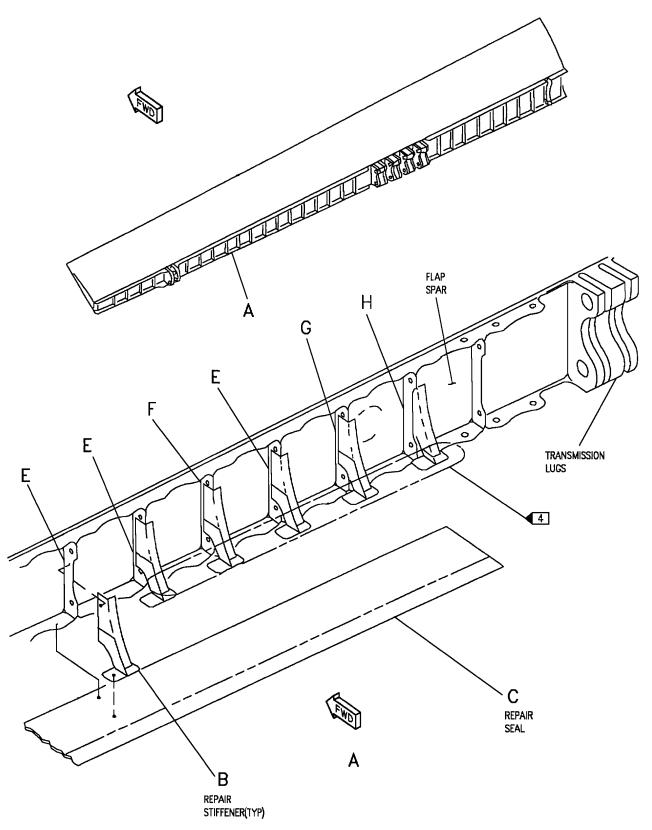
Seal, 74A190617, Repair (Sheet 1)
